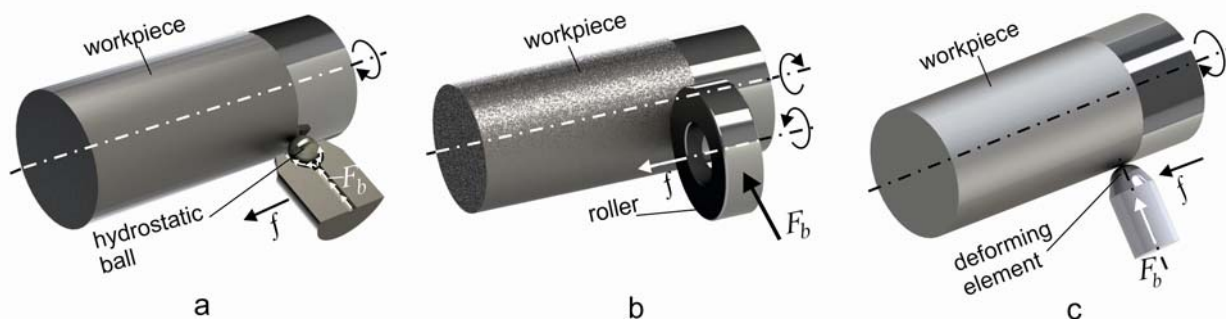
Basic burnishing methods: a. ball burnishing; b. roller burnishing; c. slide burnishing
